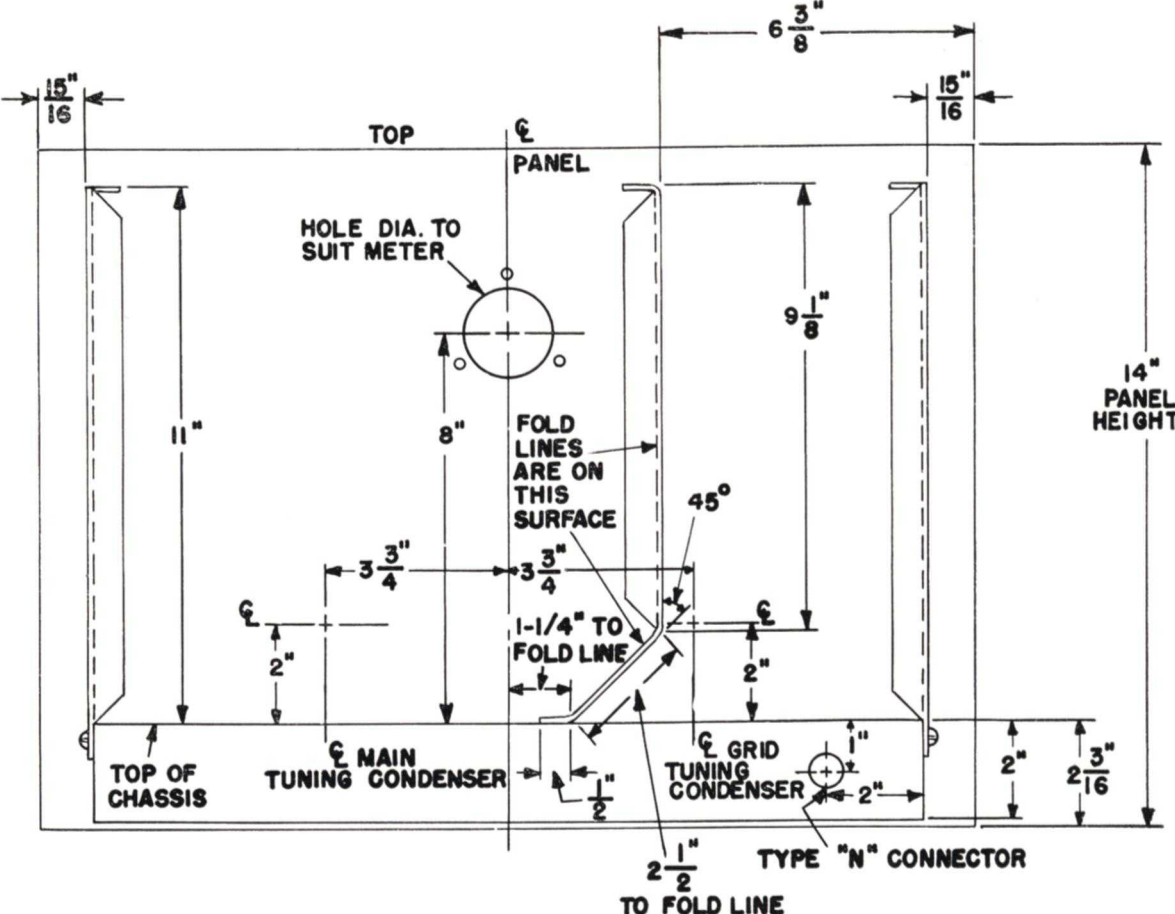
Detail of Chassis and Panel Assembly (Rear View)
